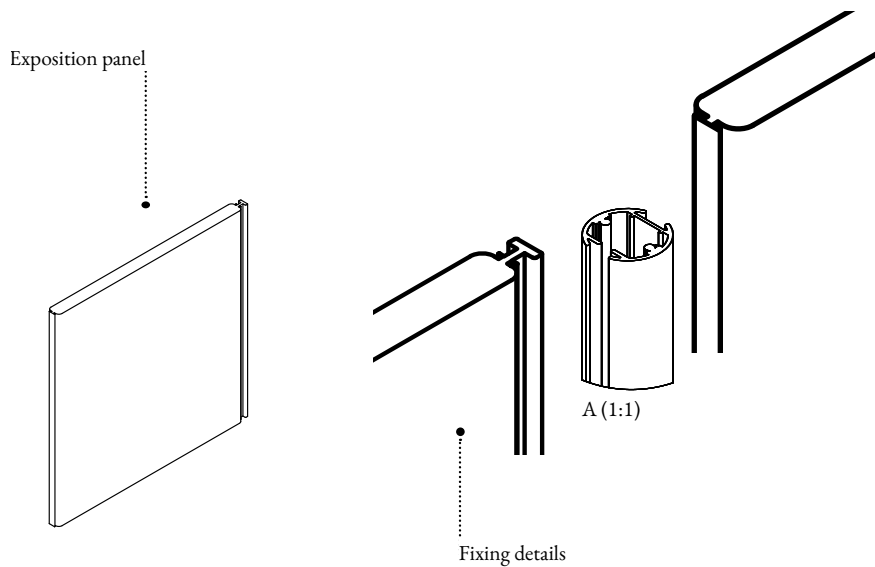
Construction detail - Joint enabling interlocking between panels | Axonometric views.
